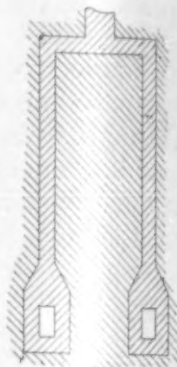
Hering Electrode Hollow Cylinder Type — Hollow Space Tamped Refractory Material.
